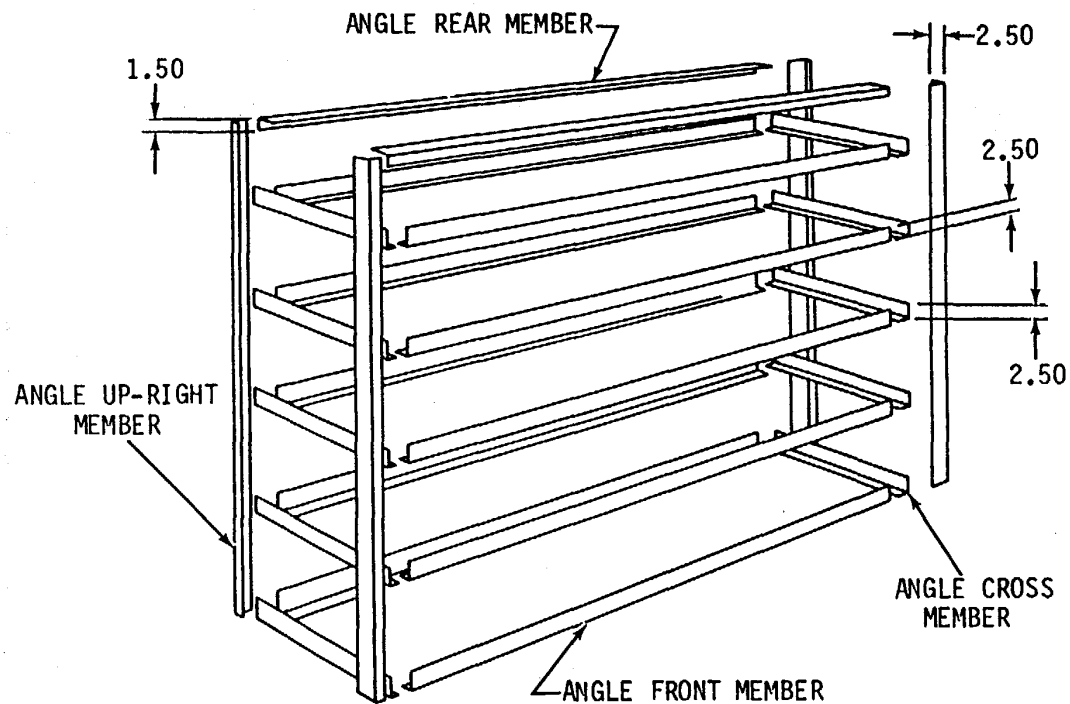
Components for Rack Assemblies, Unit 1, 280.
